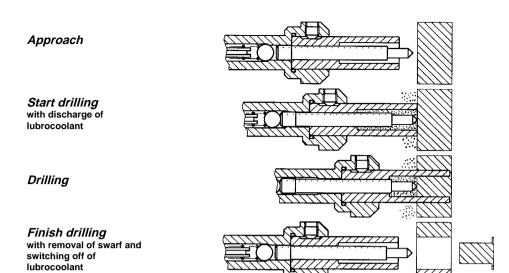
COOLANT DRILLING WITH BROACH CUTTER
